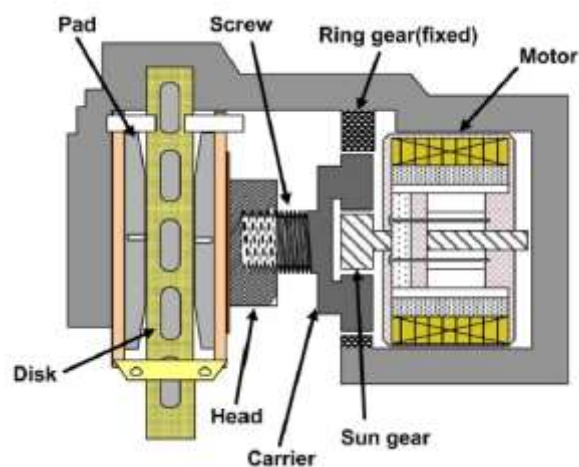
Electromechanical brake caliper using Servomotor [1]
